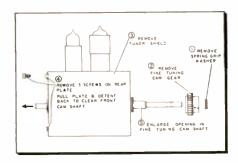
Fine tuner binding on some RCA TV's can be corrected by enlarging hole in cam shaft with a $\frac{1}{4}$ " drill held in a tap wrench.
